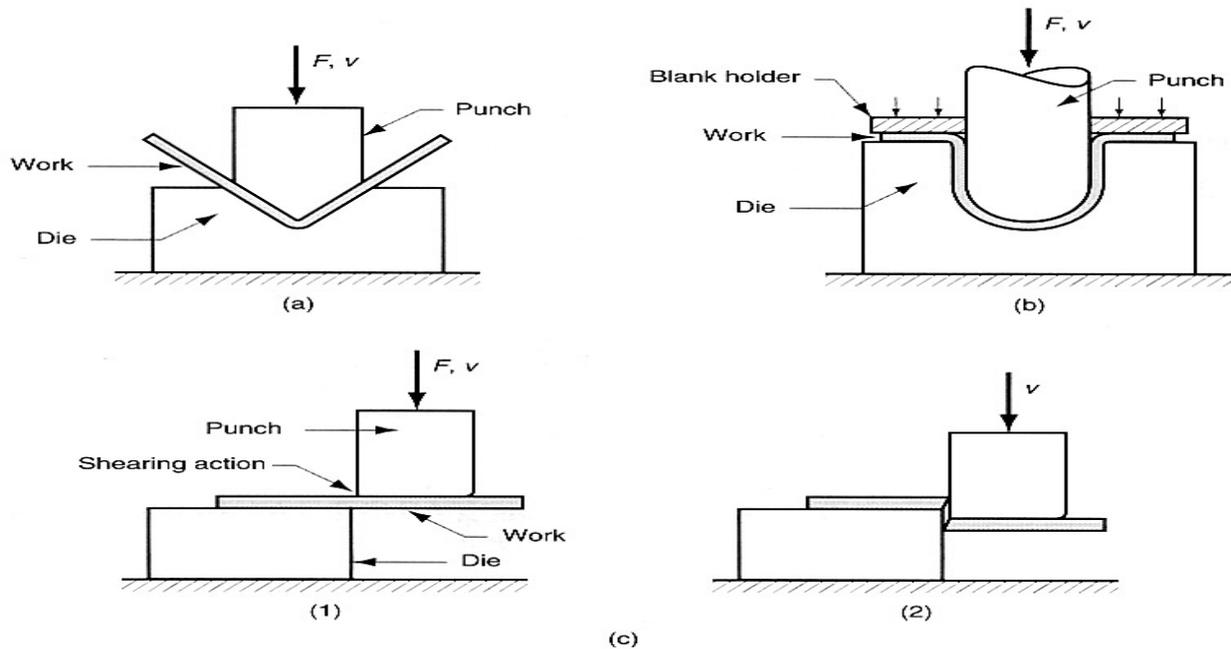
Basic sheet metalworking operations: (a) bending, (b) drawing, and (c) shearing; (1) as punch first contacts sheet and (2) after cutting. In the Figure, F and v indicate force and relative motion
